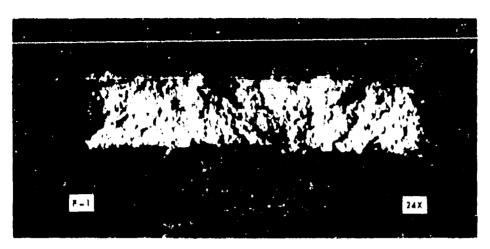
Welded Specimen F-1. Discoloration on Periphery of Fracture Surface. (Environmental-test conditions: 1800F, 3 ksi, salt; duration: 63 Gycles) (H-64101, Mag: 24X)
